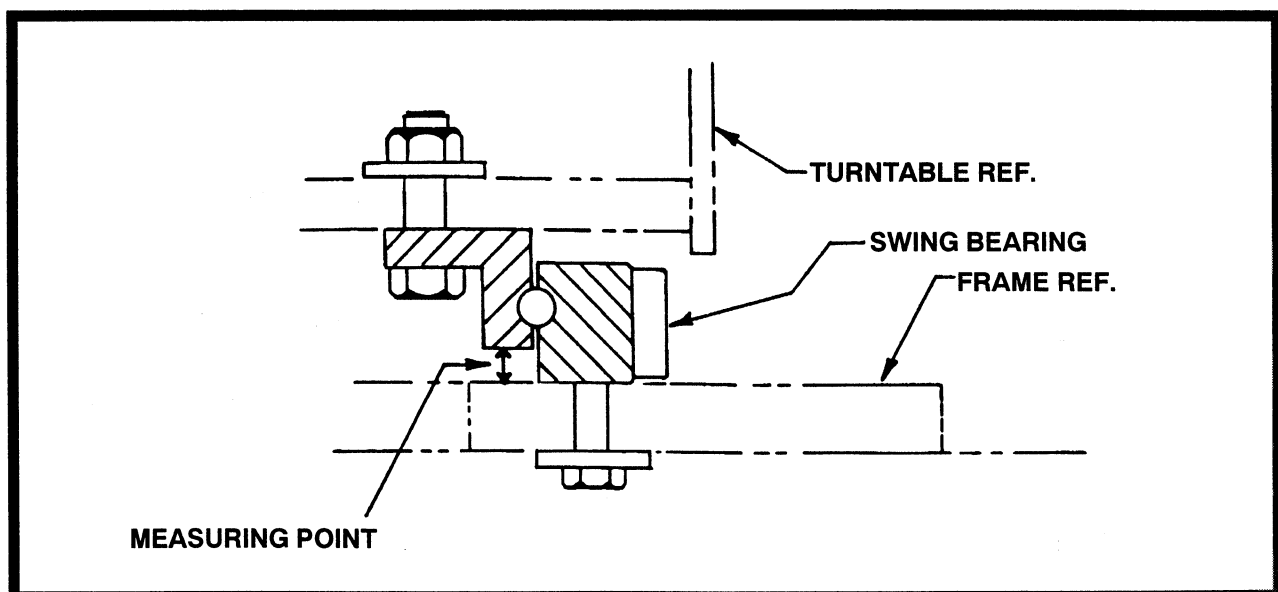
Swing Bearing Tolerance Measuring Point.
